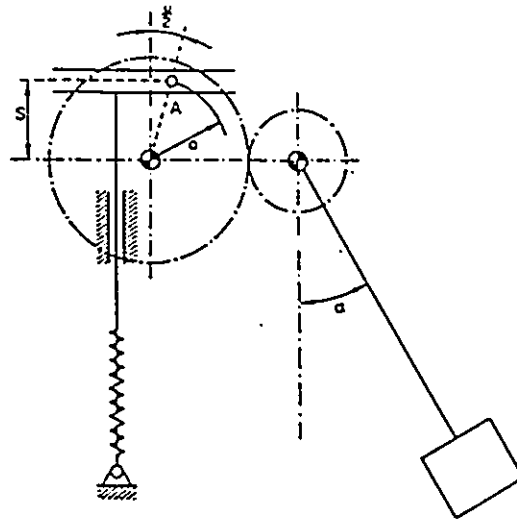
Geared mechanism for the balancing of a lever by spring
